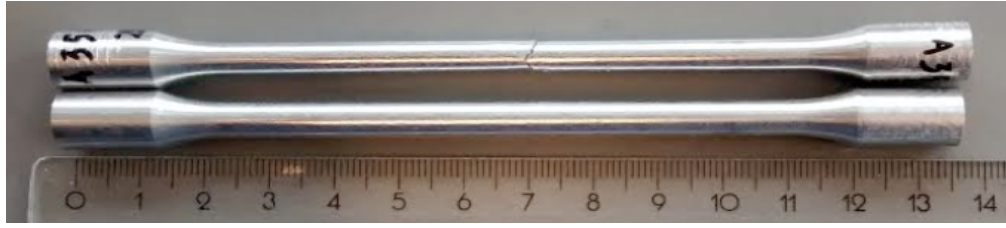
Tensile specimen before and after the Hot Tensile Test.
